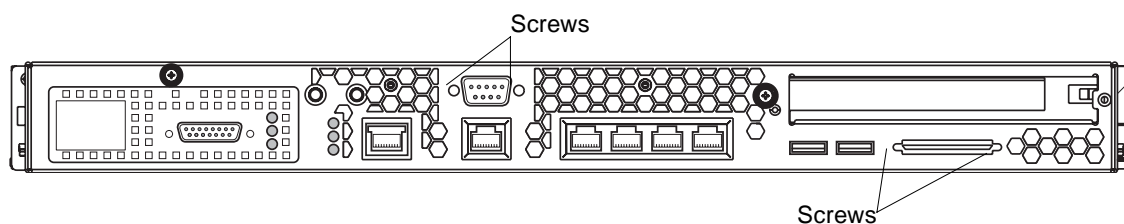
Installing the SCSI and Serial Port Screws
